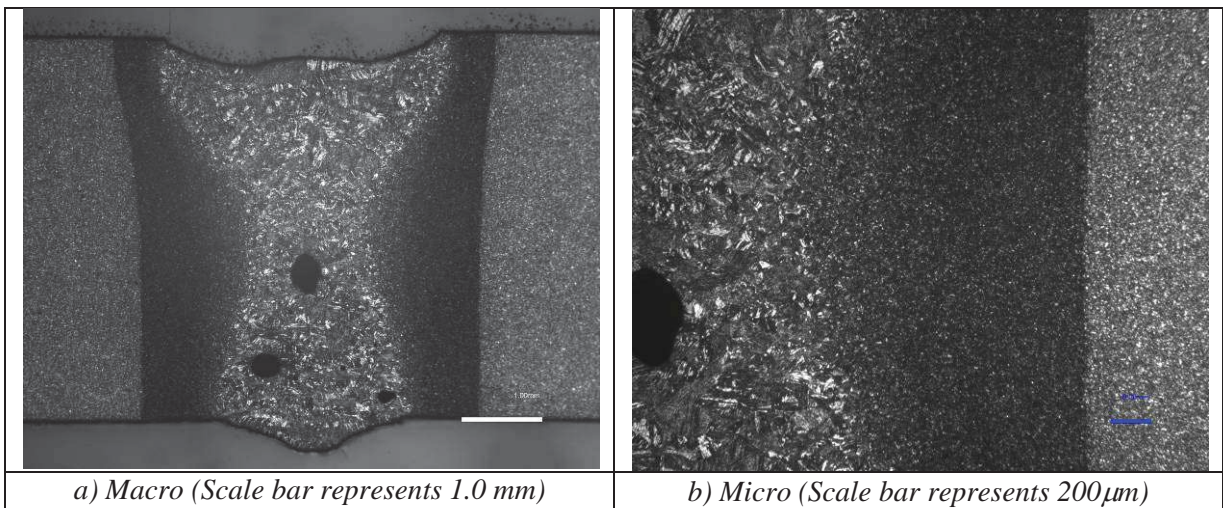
Welding conditions of 3.5 kW and 16.7 mm/s (210 J/mm)
